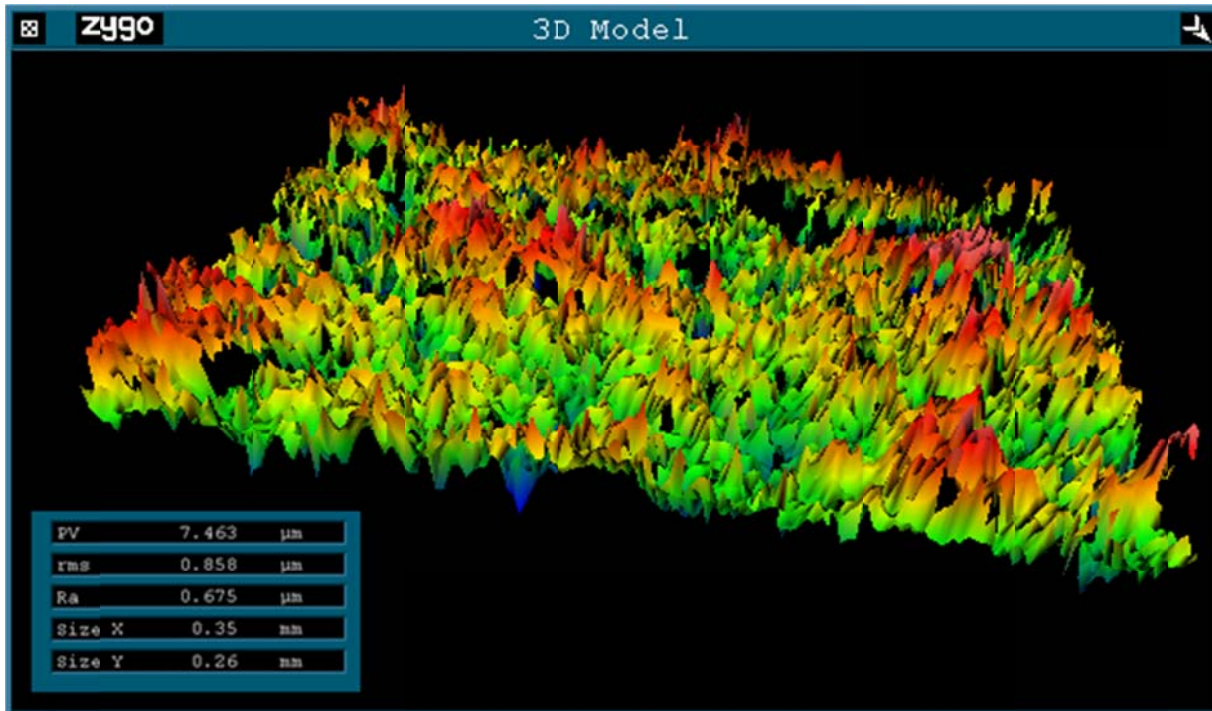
Inner surface profile of the stainless steel tube (1.5 mm test section)
